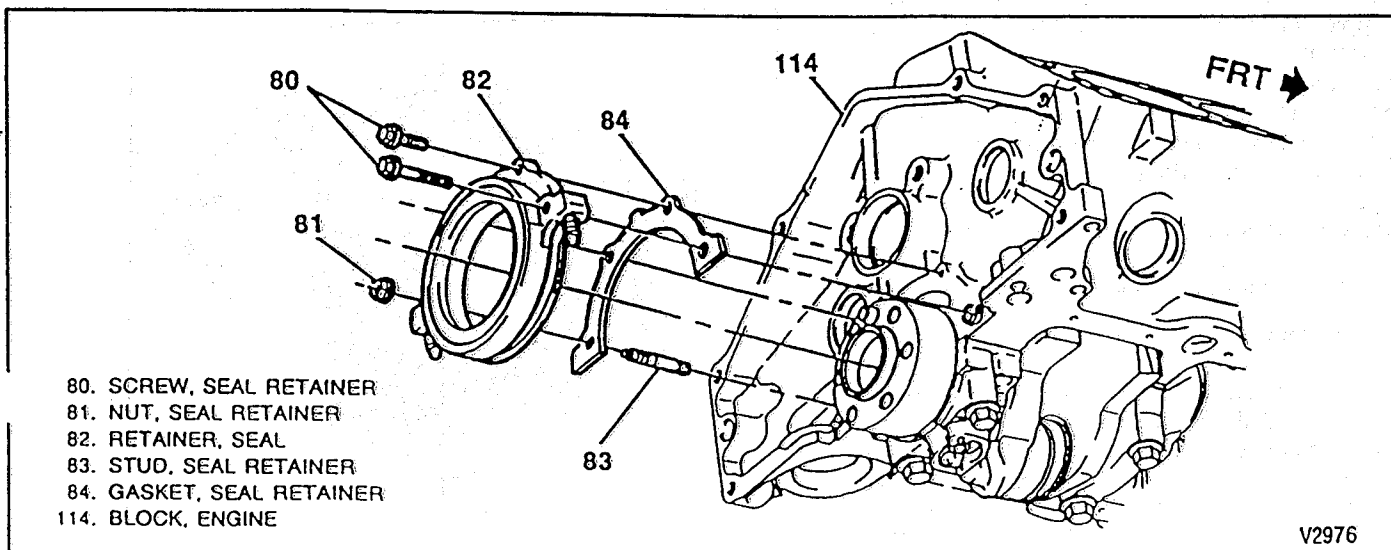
Crankshaft Rear Oil Seal Retainer (5.0L and 5.7L Engines)
